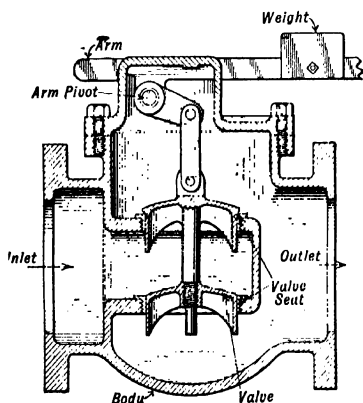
Pratt & Cady Lever and Weight Back Pressure Valve
